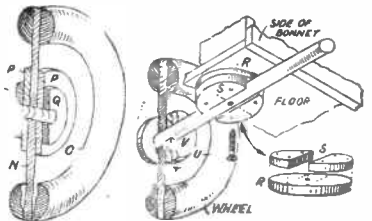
The wheel parts Fig. 5—The axle fitting wheel parts
